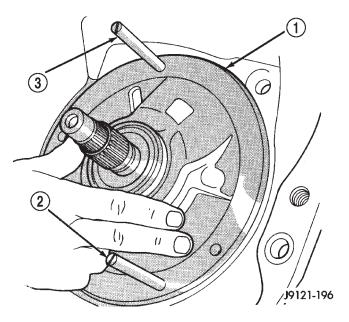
Installing Oil Pump And Reaction Shaft Support
